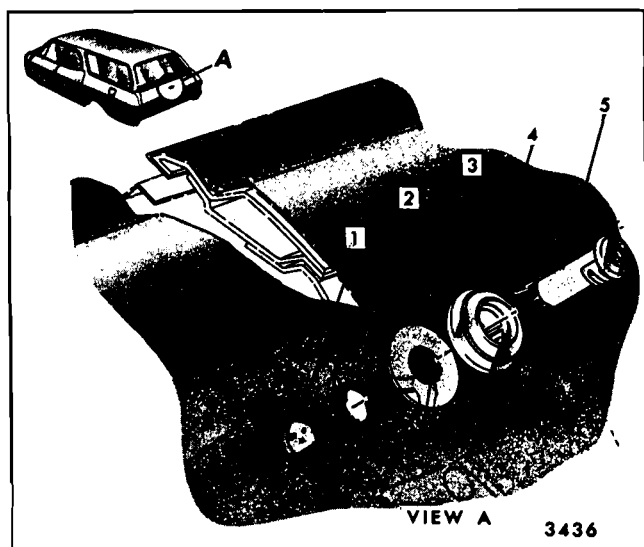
Dual Gate Electric Key Switch and Cylinder Removal - "A" Body
